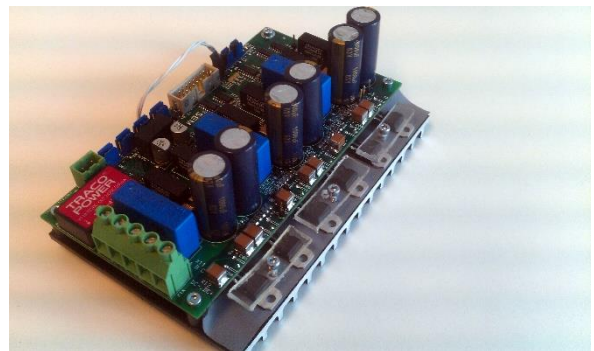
MOSFET soldering process for the inverter circuit board
